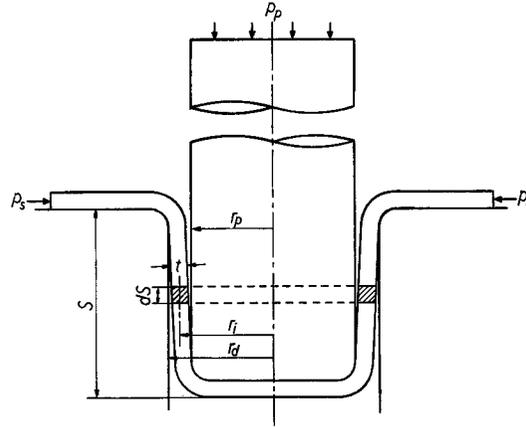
Explanatory diagram for the work required to draw a blank by dS in this deep drawing process.
